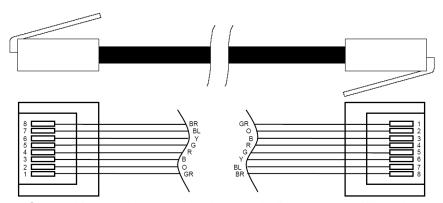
Standard RJ-45 cable assembly wiring details (PN 10740053). Wire colors may vary.
